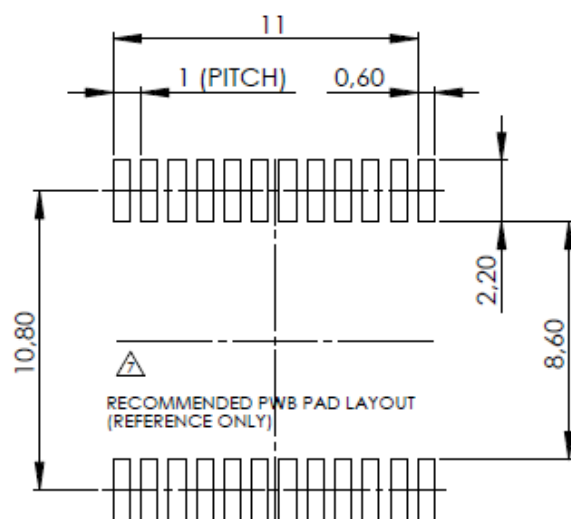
Recommended PWB pad layout for SCR2200-D13. The tolerances are according to ISO2768-f (see Table 9).
